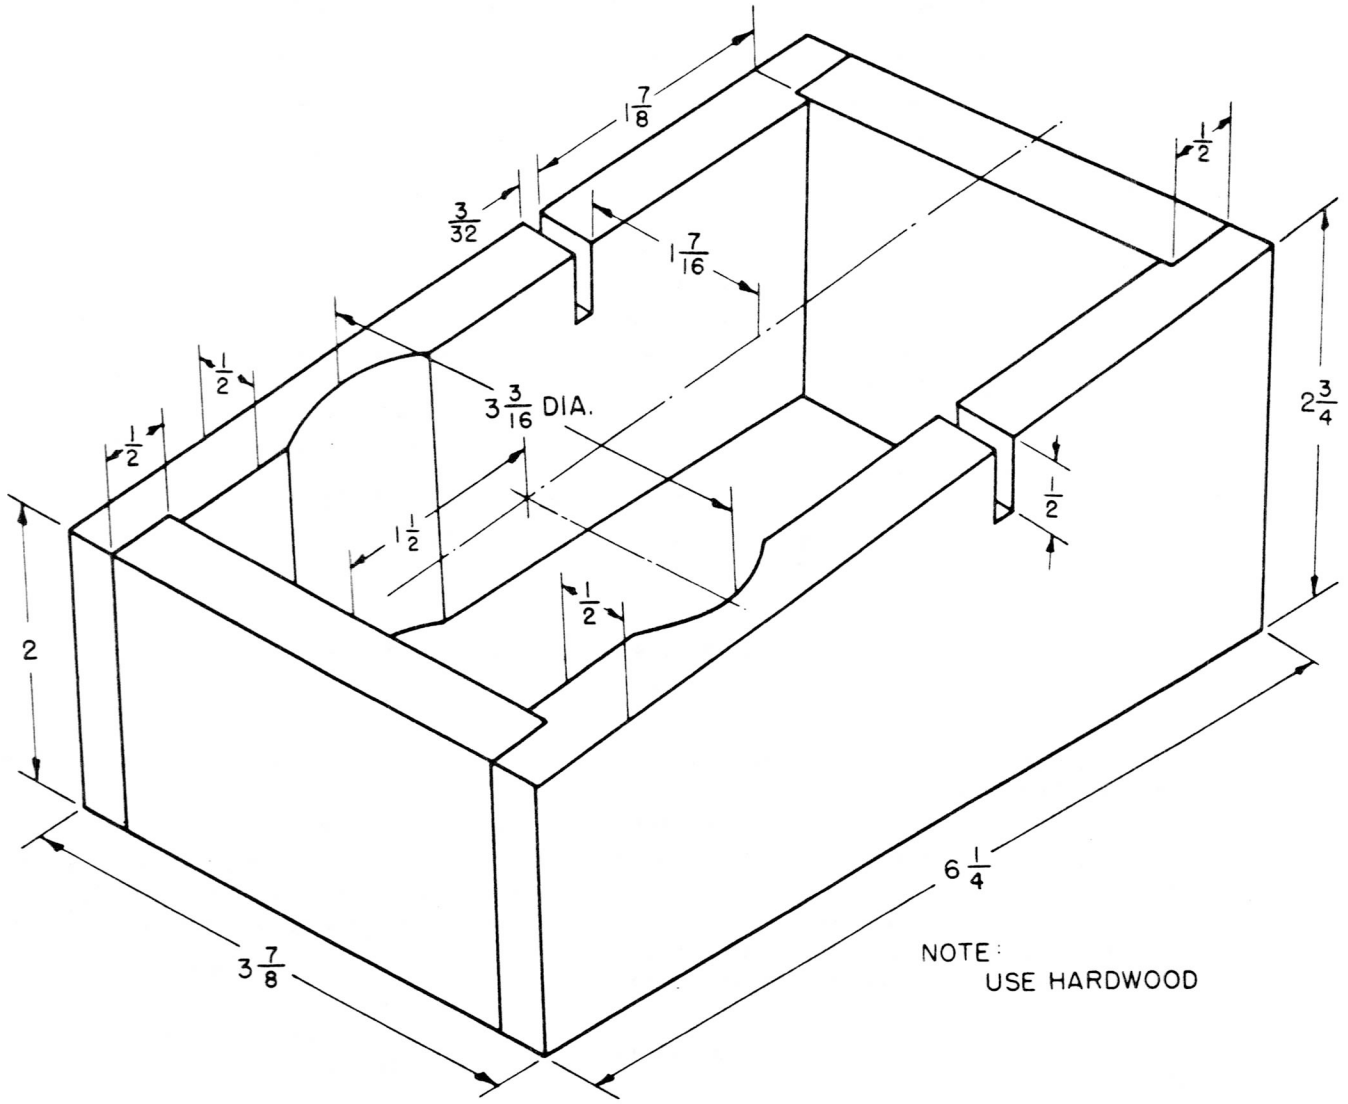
A—Fixture T-1 for Holding Dial Change Indicator
